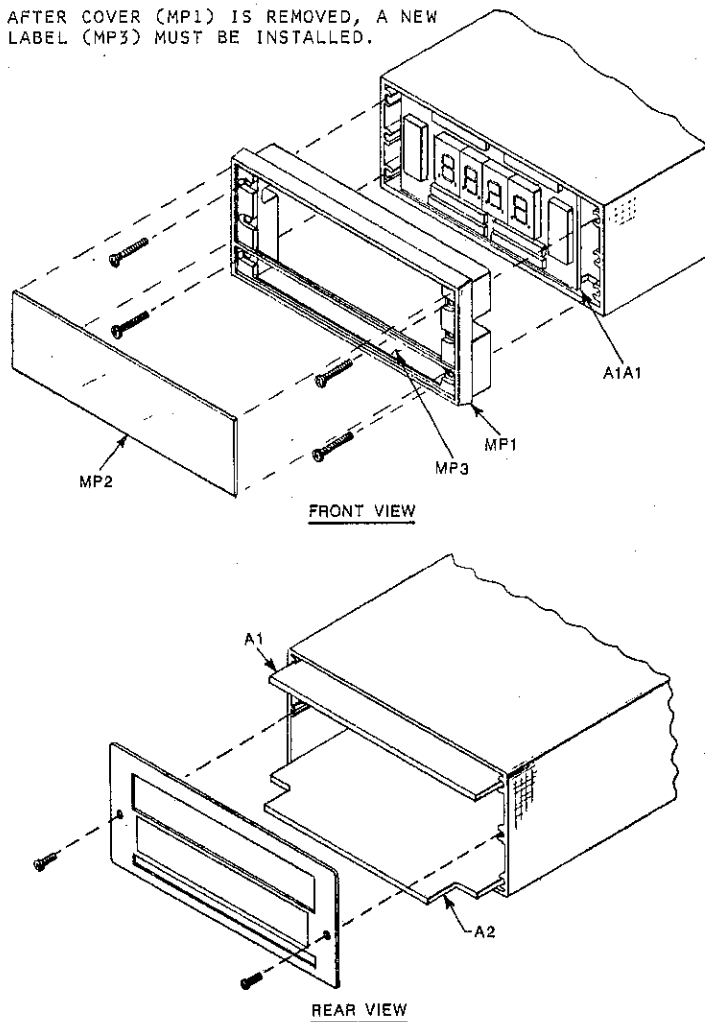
Model 801 Synchro Panel Meter (P/N 408110), Exploded View
